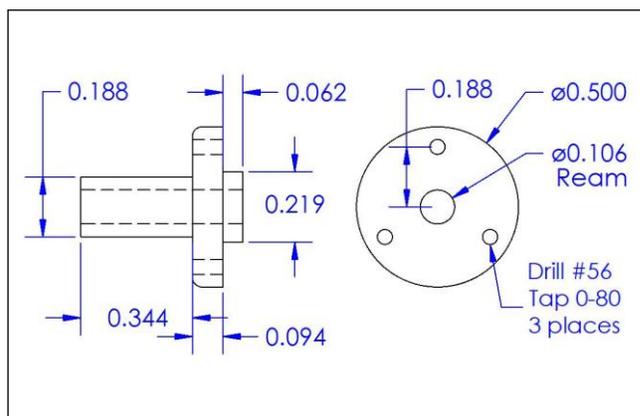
Construction drawing for the escape wheel collet. Identical collets are used for the third and fourth wheels. The second wheel collet is similar except the center hole is reamed .125".
